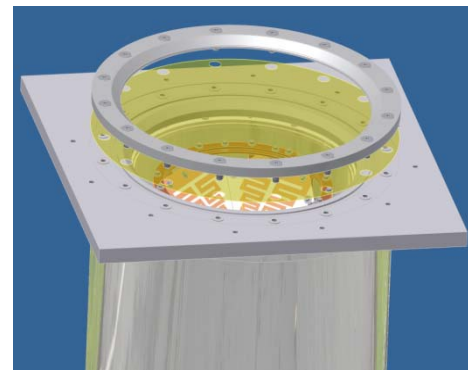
CAD drawing of the receiver cryostat with exploded view of the vacuum window
